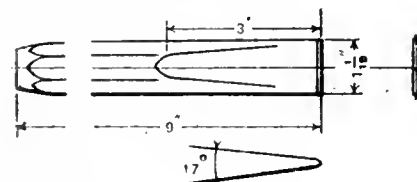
HEAVY IRON AND STEEL CASTINGS.
